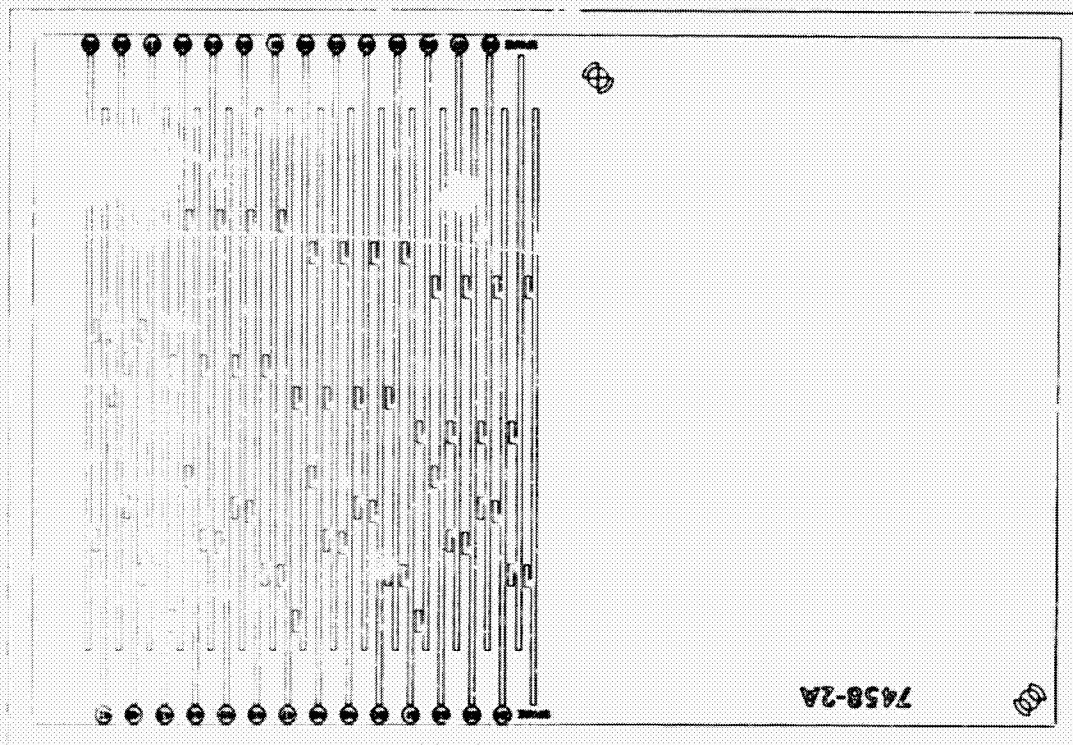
Flight control computer circuit assembly, sheet 2 of 2.
